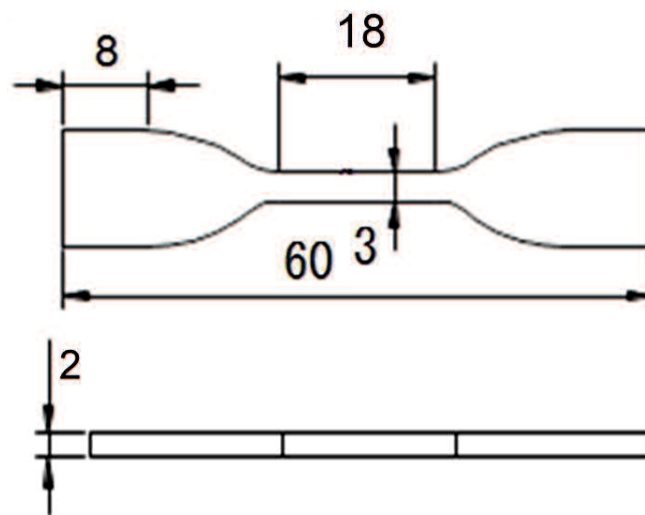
Shape and dimension of neat and each type of WPCs specimens.
